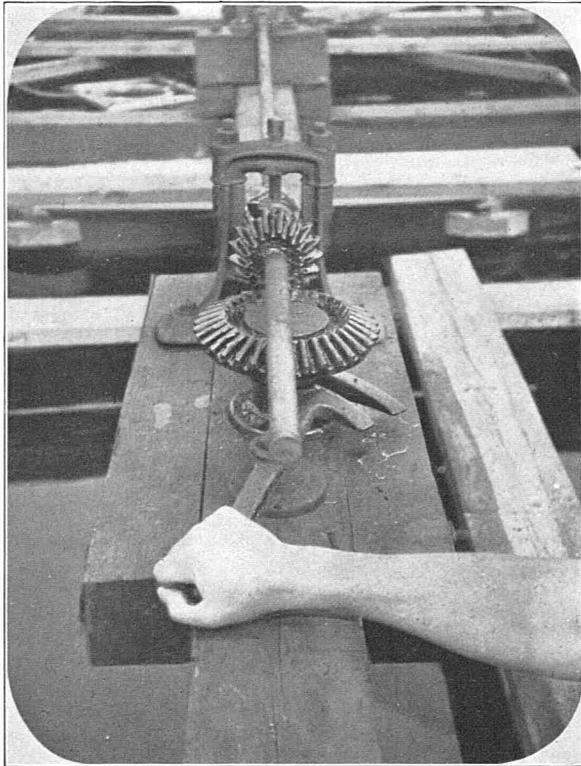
Detail of device for throwing propeller in and out of gear. By pulling the lever the propeller shaft and its gear drop as in fig. 22.
